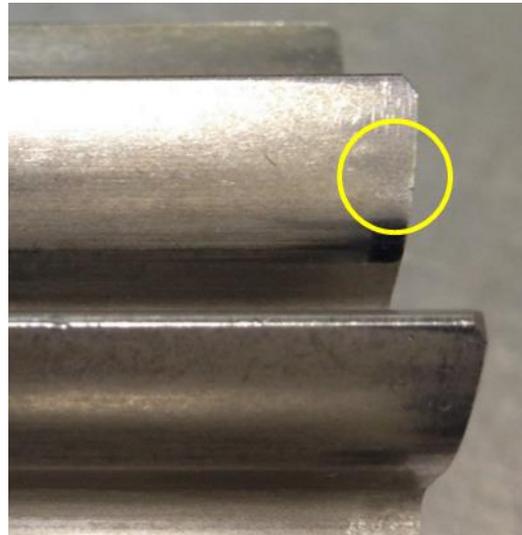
Pump no.2 after SSADT. Drive gear pocket exhibiting erosion.
